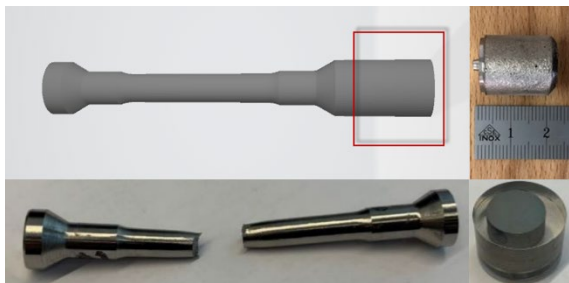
Tensile tests sample with integrated microsection specimen (red box).
